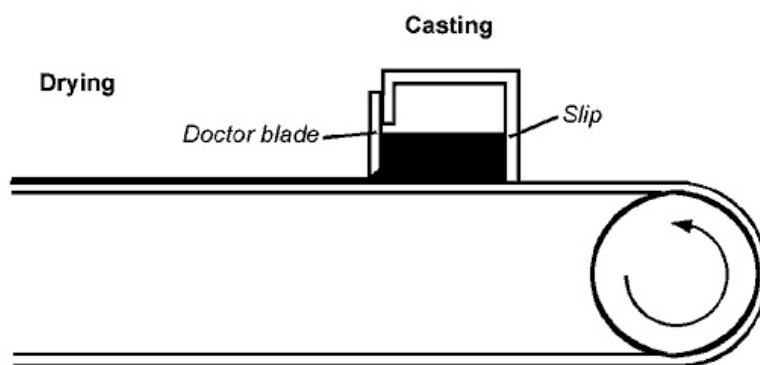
A figure which shows the principle of tape casting. Here with a doctor blade [83].
